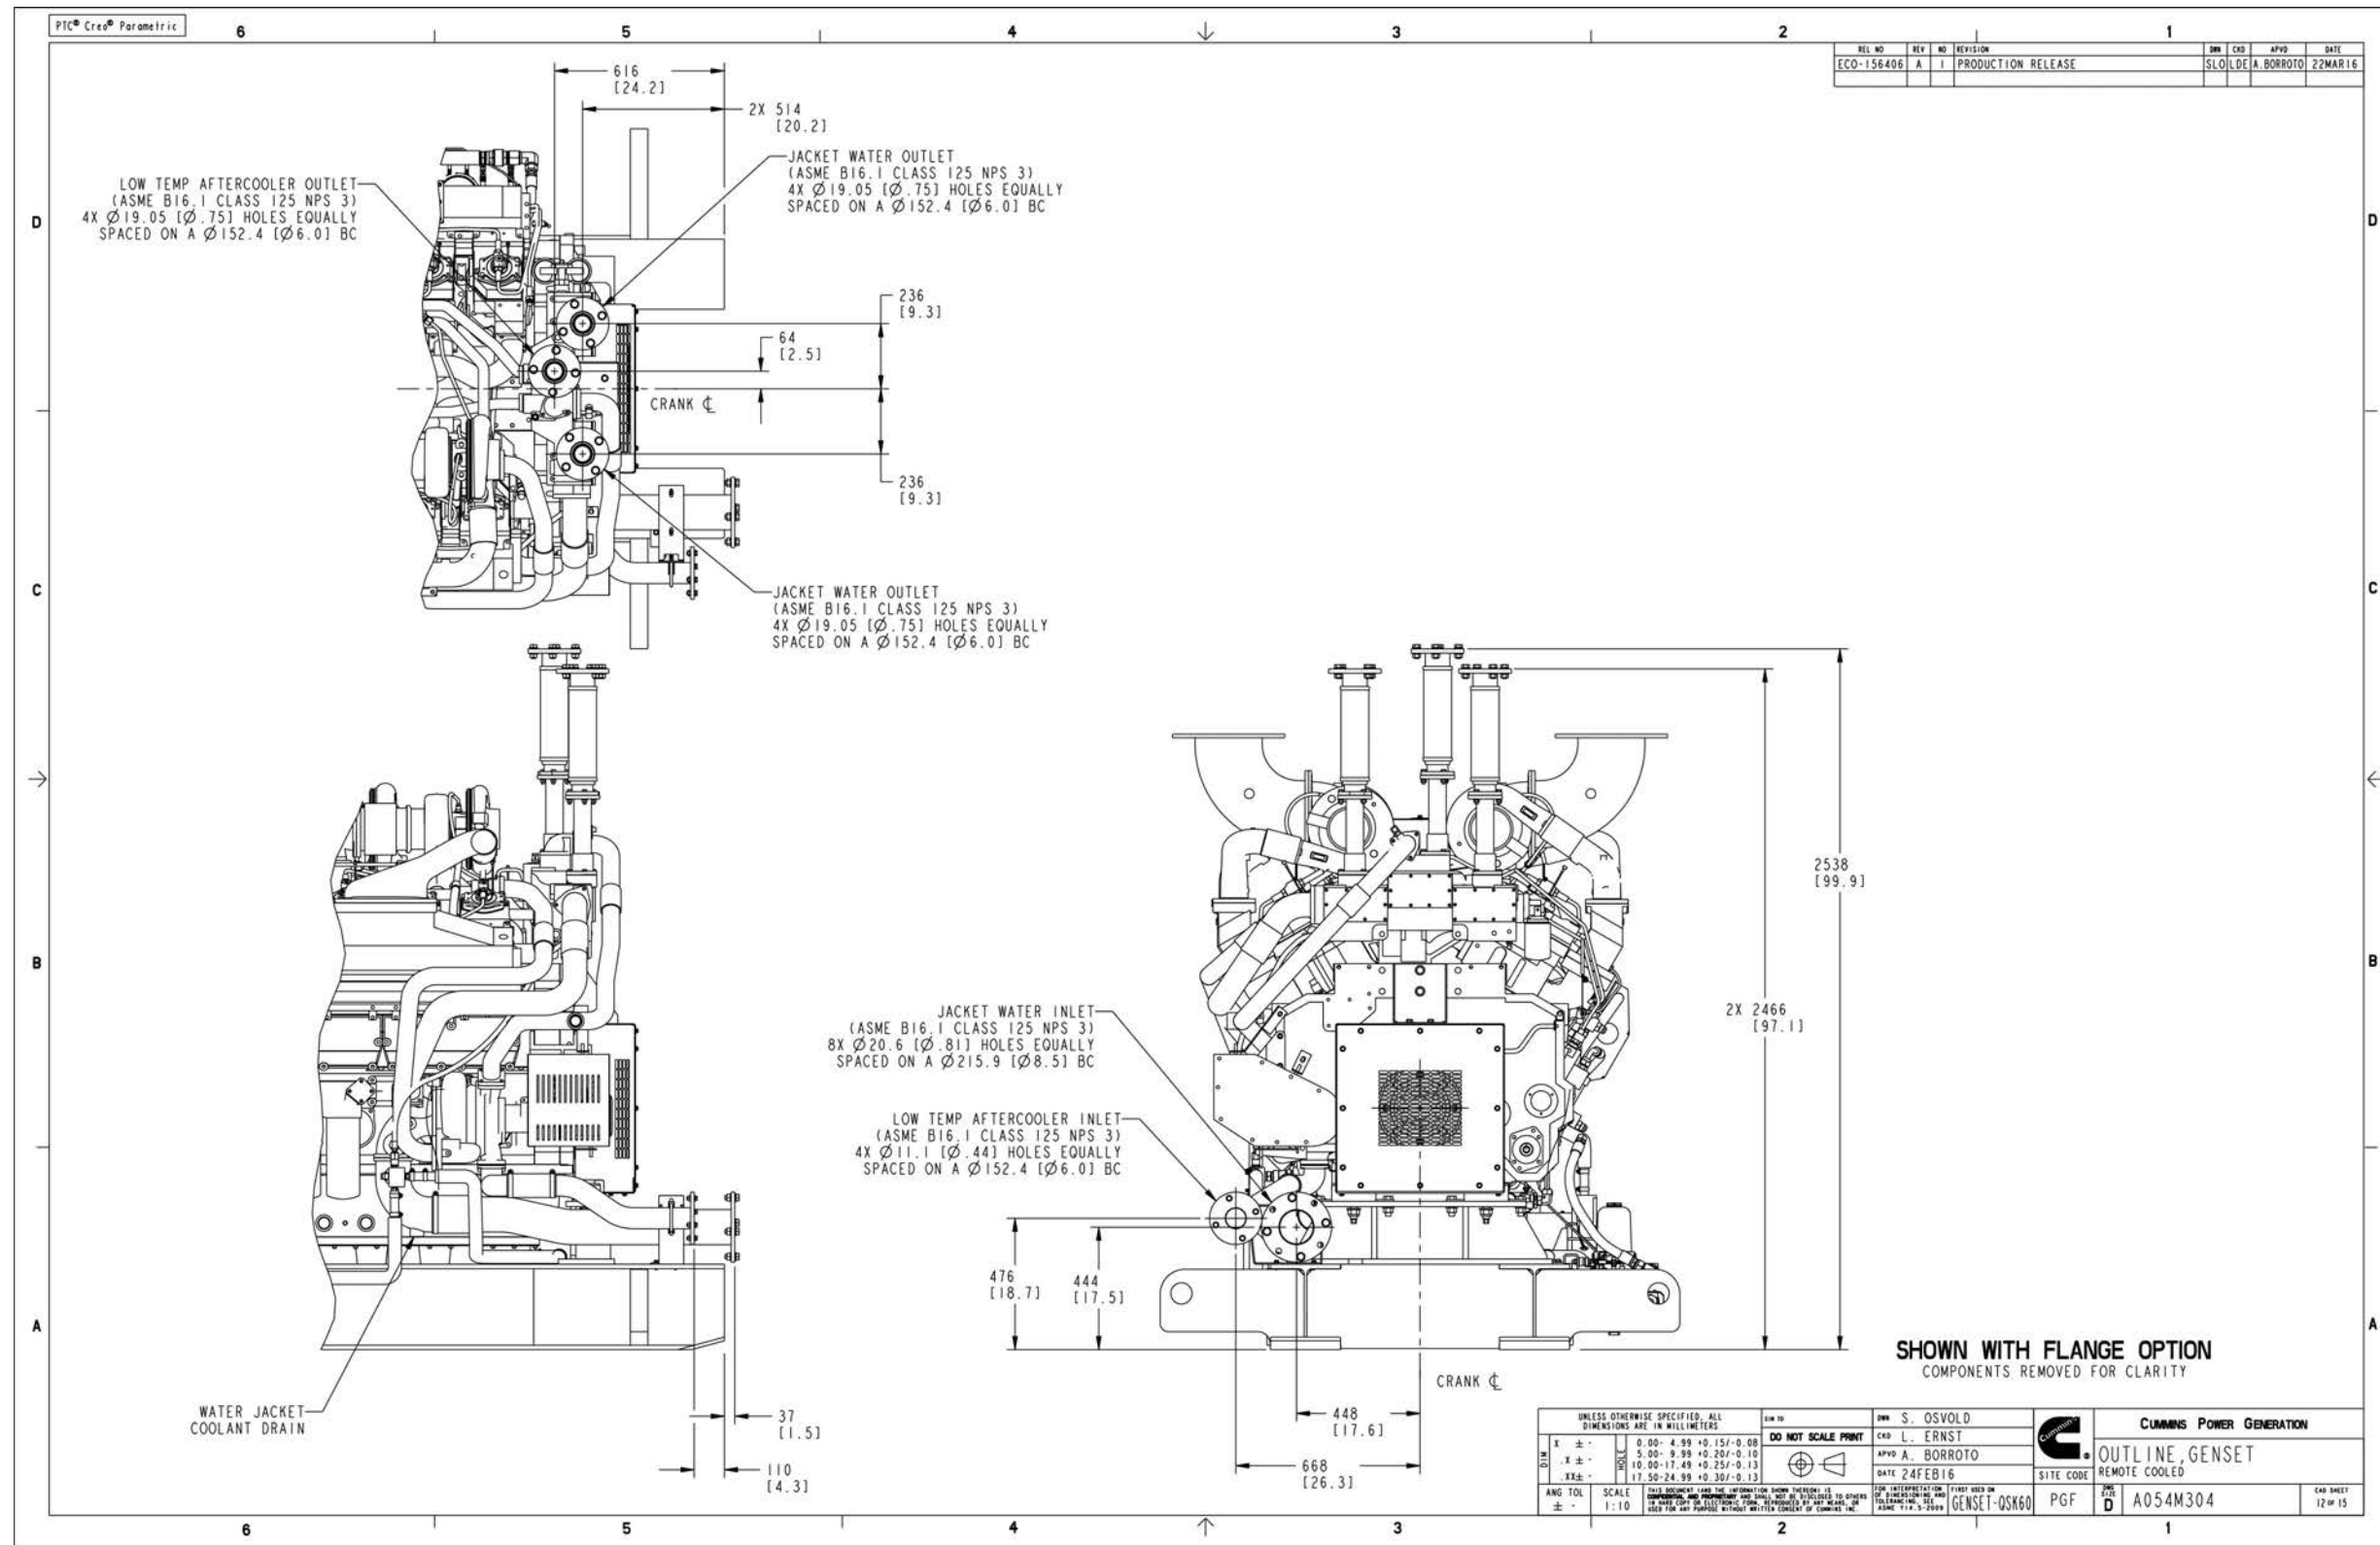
GENERATOR SET WITH REMOTE COOLING OUTLINE DRAWING (SHEET 12)
